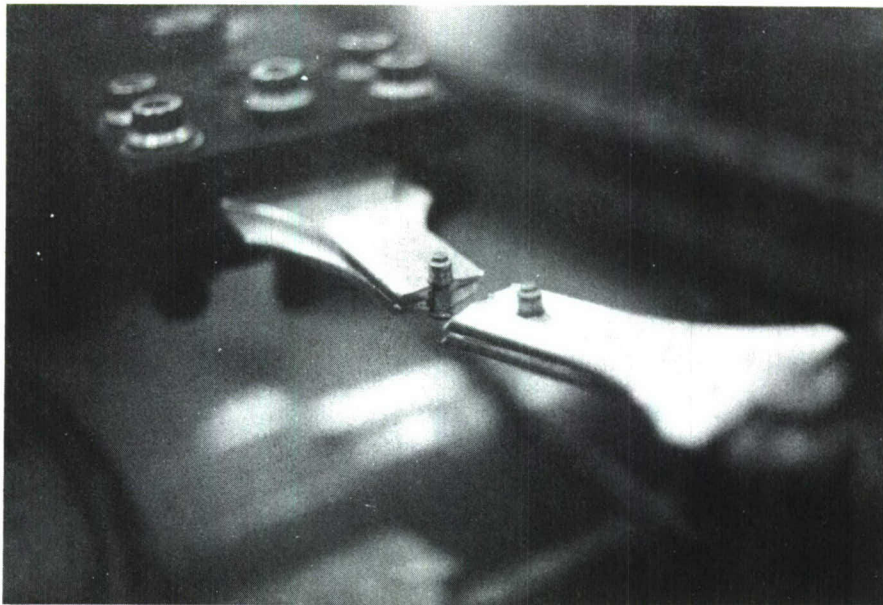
Typical Failure of a 5% Load Transfer Specimen
